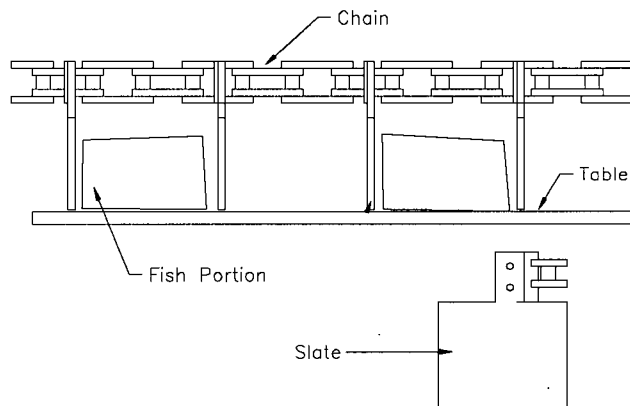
A Chain Conveyor and Slated Mounted on It.
